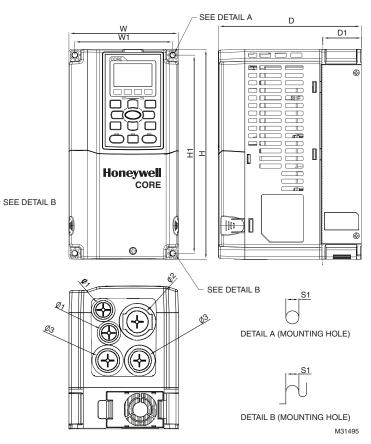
Frame A: Units in mm (inches). See also Table 1.
